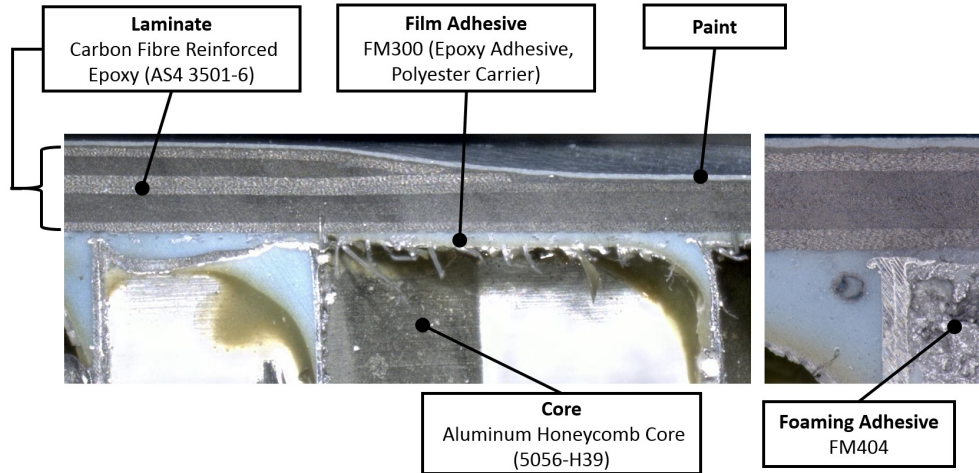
Sandwich panel cross-section with the facesheet, core and adhesive materials detailed.
